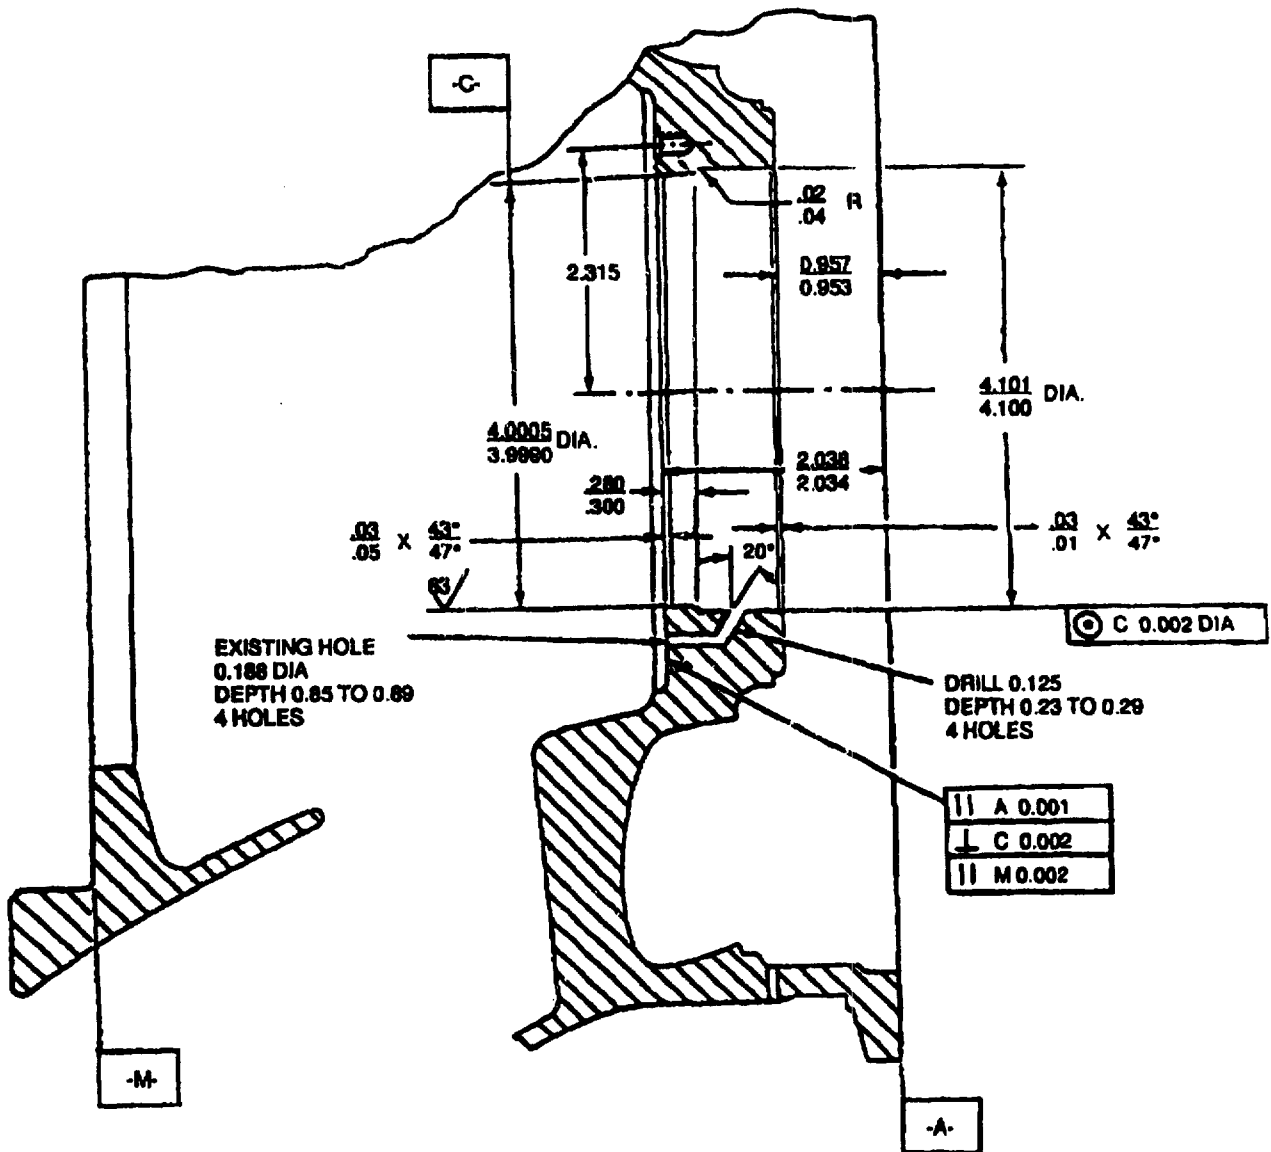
Inlet Housing Bearing Bore Repair (Sheet 1 of 2).
